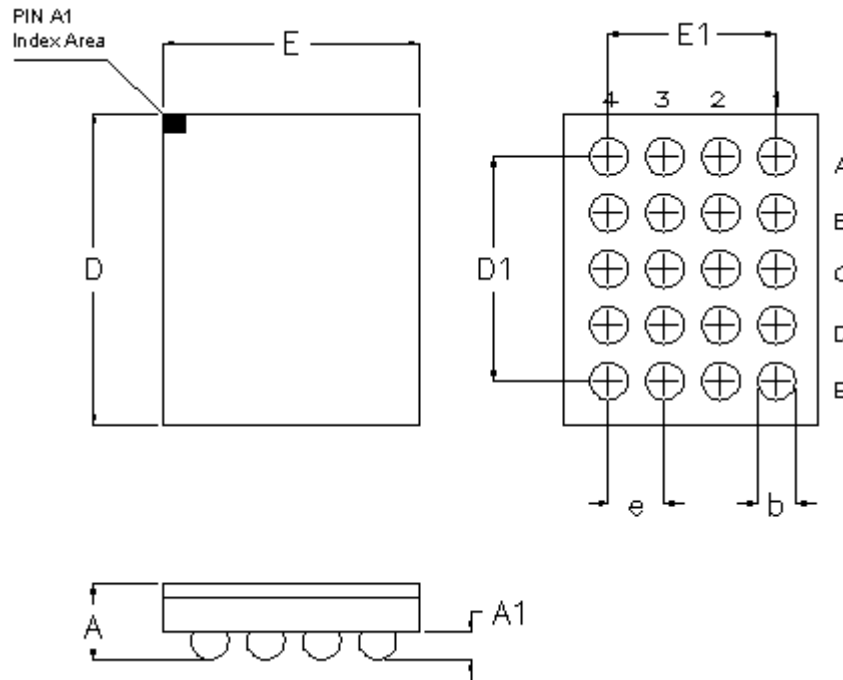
PCB Layout Guide for WL-CSP-20B 1.82x2.22 (BSC)
